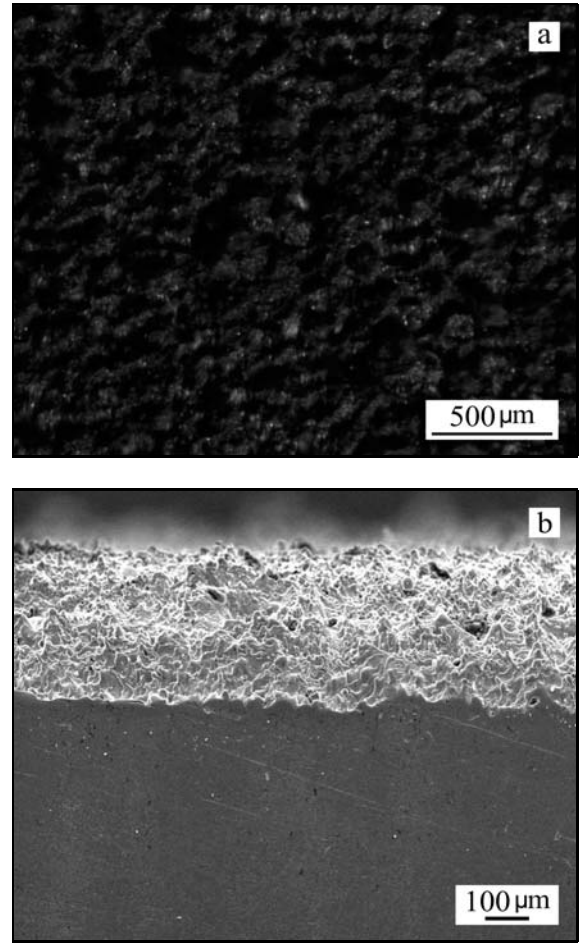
The sample of machined surface at 30 W, 20 kHz and 200 mm s<sup>-1</sup>: (a) top view and (b) cross section.
